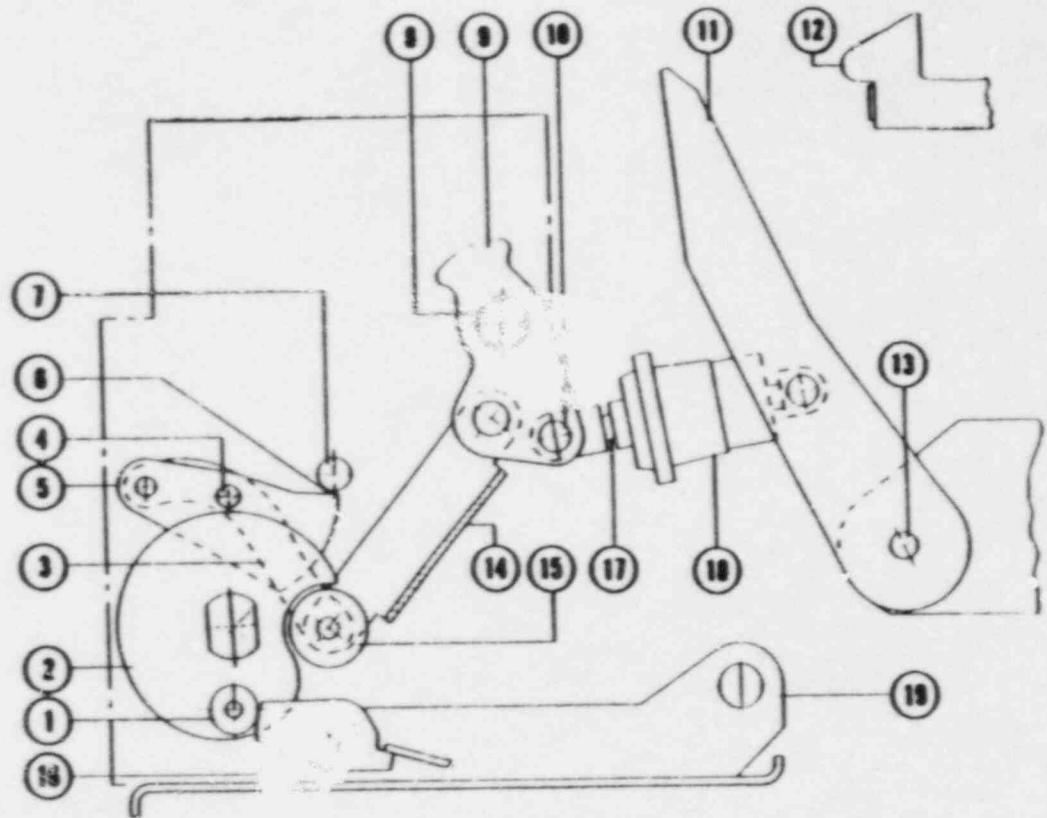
Linkages of DS-416 Breaker Mechanism Shown with CB Open and Springs Charged (Source: Reference 5)
